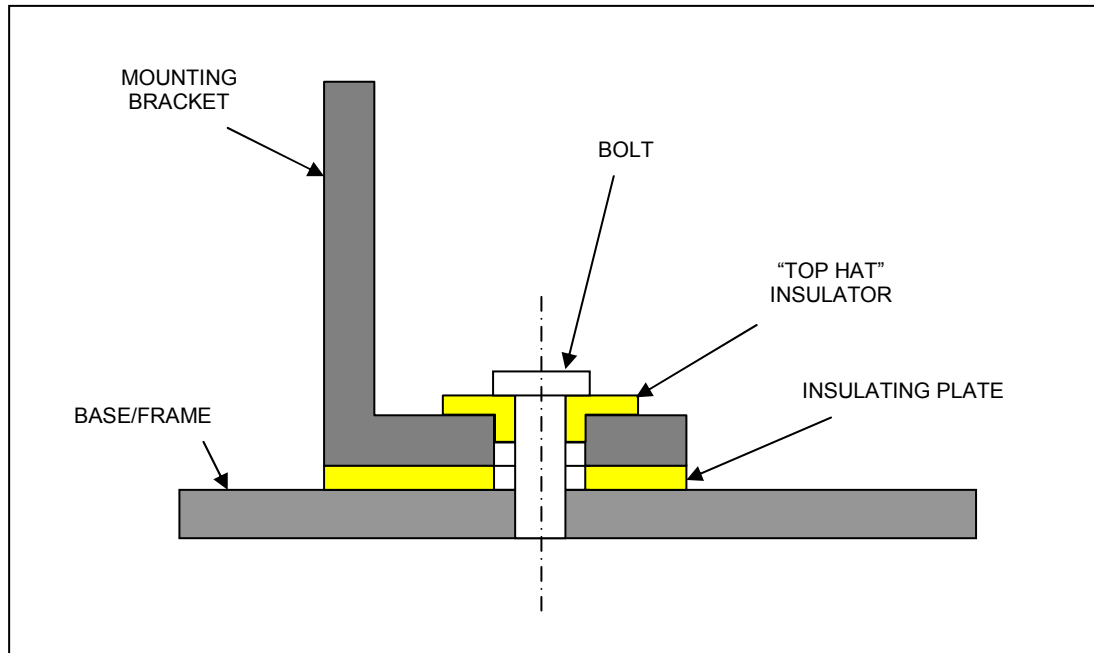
Method to electrically insulate a mounting bracket from a base plate or frame
